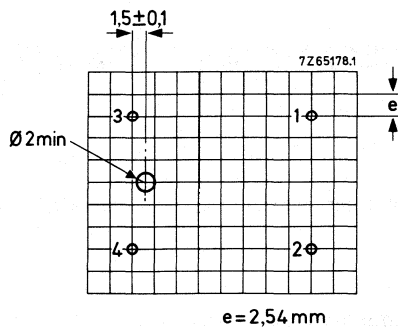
Hole pattern for mounting on a printed-wiring board, hole diameter  $1,3 \pm 0,1$  mm.
